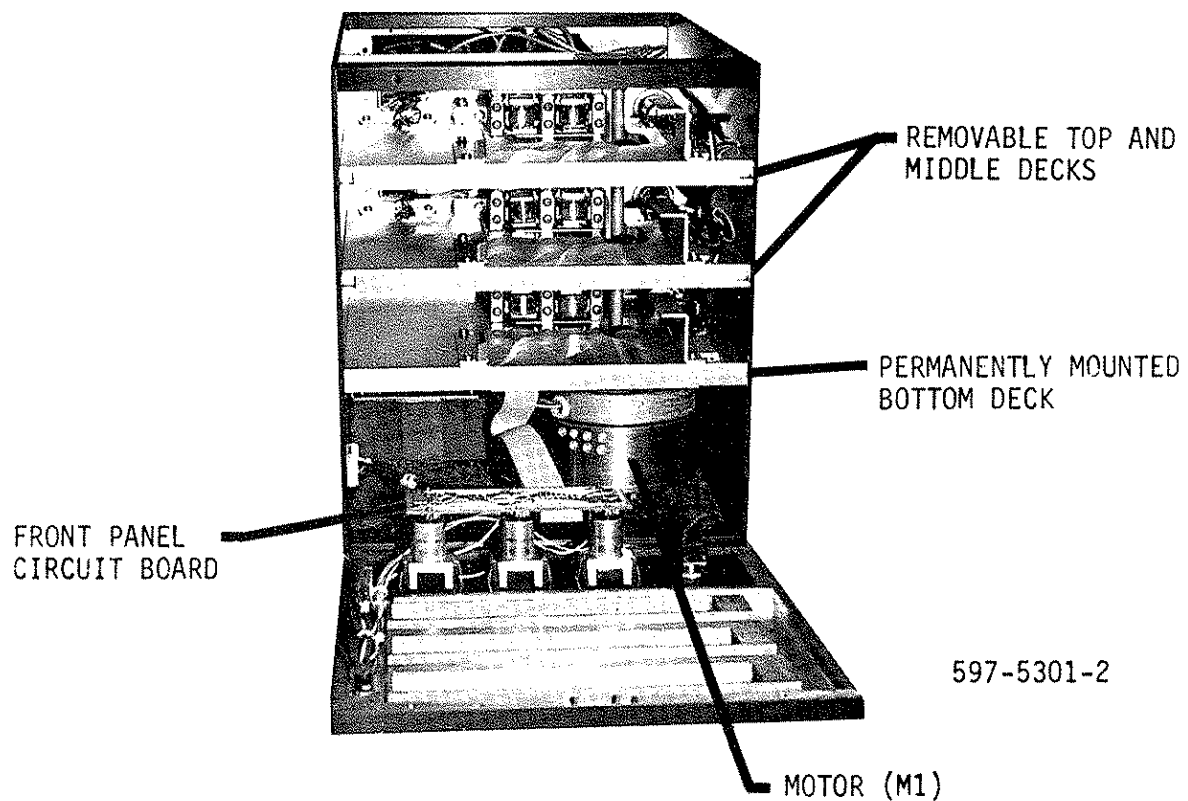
FRONT VIEW: PANEL OPEN
